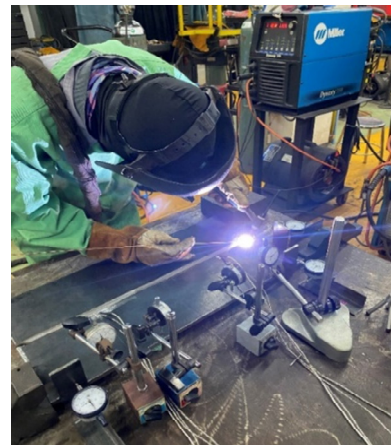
GTAW-SMAW hybrid welding process.
